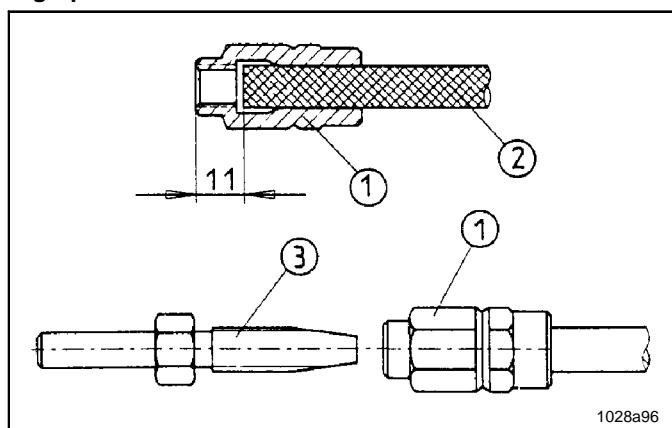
Preassembly of threaded sleeves and hose studs on the high-pressure hose
